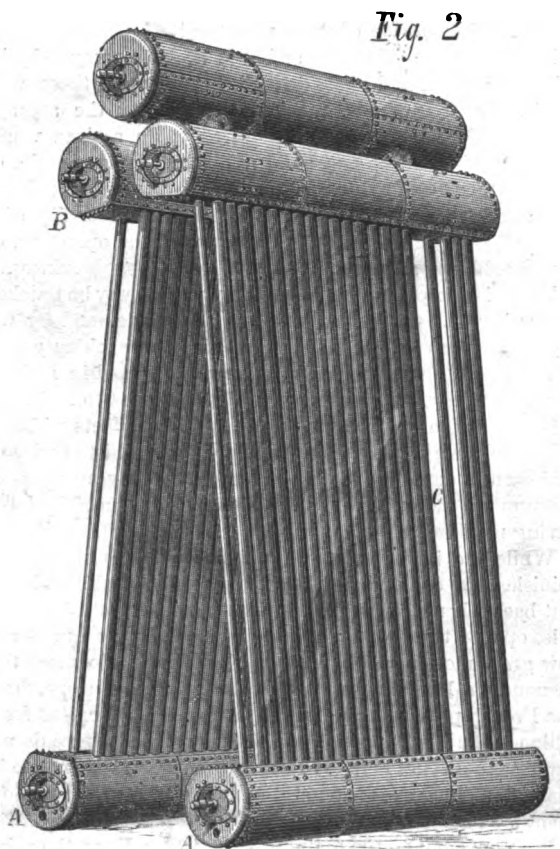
THE FIRMENICH SAFETY STEAM BOILER.
